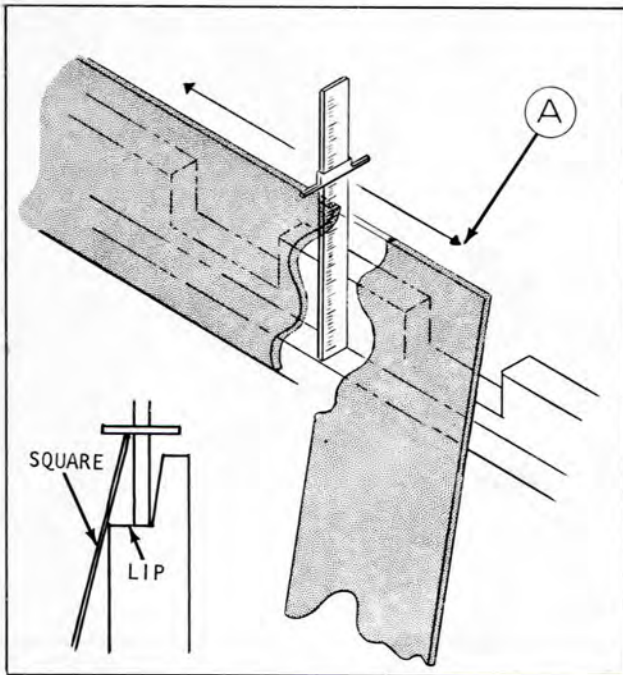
Squaring Carriage Rollers (Six Roller Carriage)
